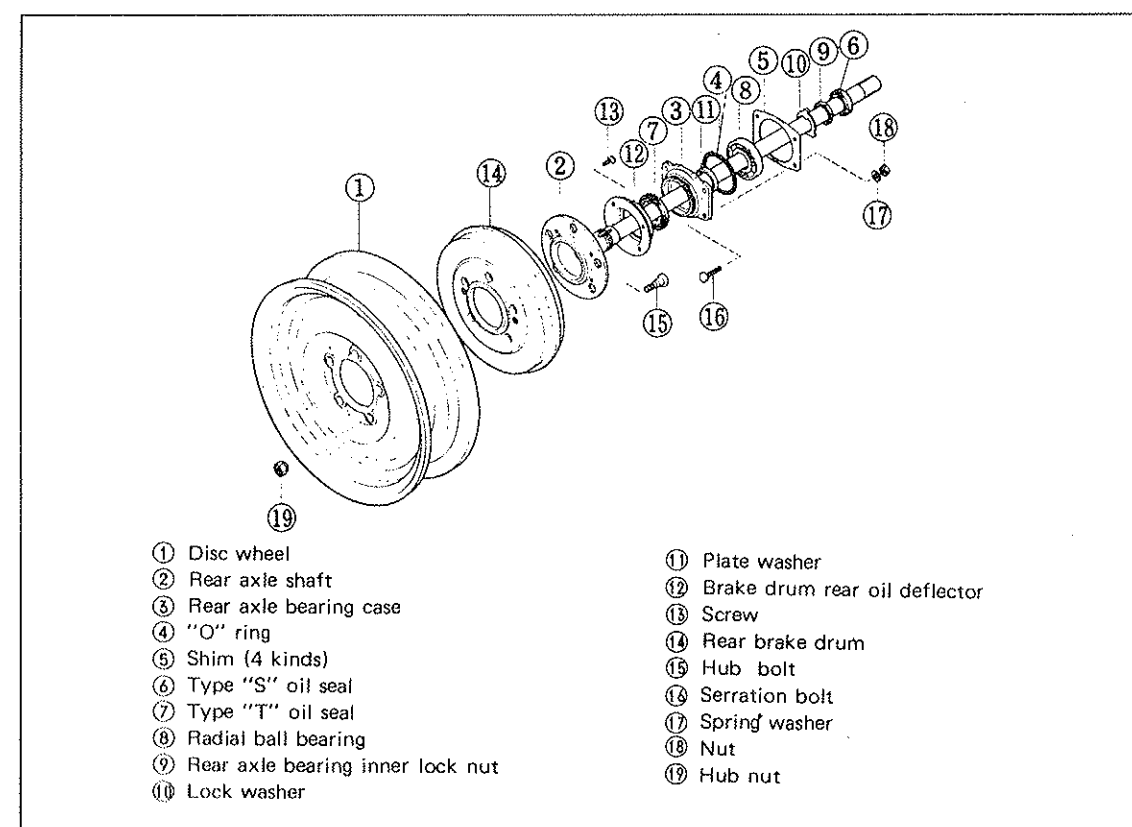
Rear Axle Shaft and Disc Wheel Components
